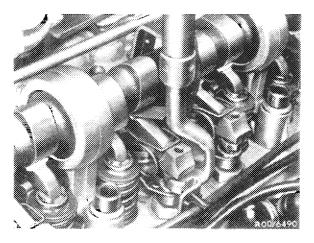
/10 Valve adjusting wrench 000 589 39 07 00 for model 230/8
